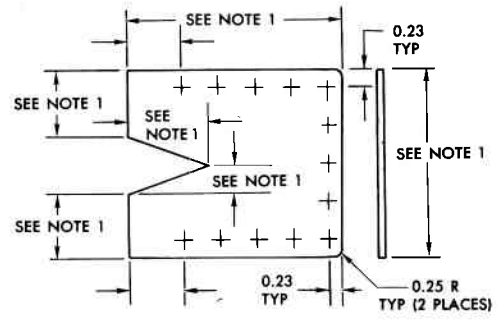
Replacement of Outboard Elevon Actuator Horn (Sheet 2 of 2)
